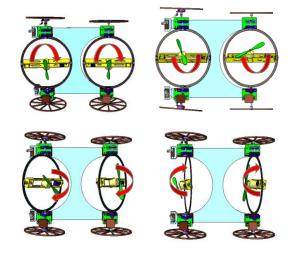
Schematic diagram of front, rear, left and right propeller head rotation
